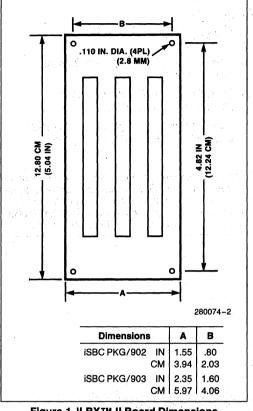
ILBX™ II Board Dimensions (iSBC[®] PKG/903 Shown)
